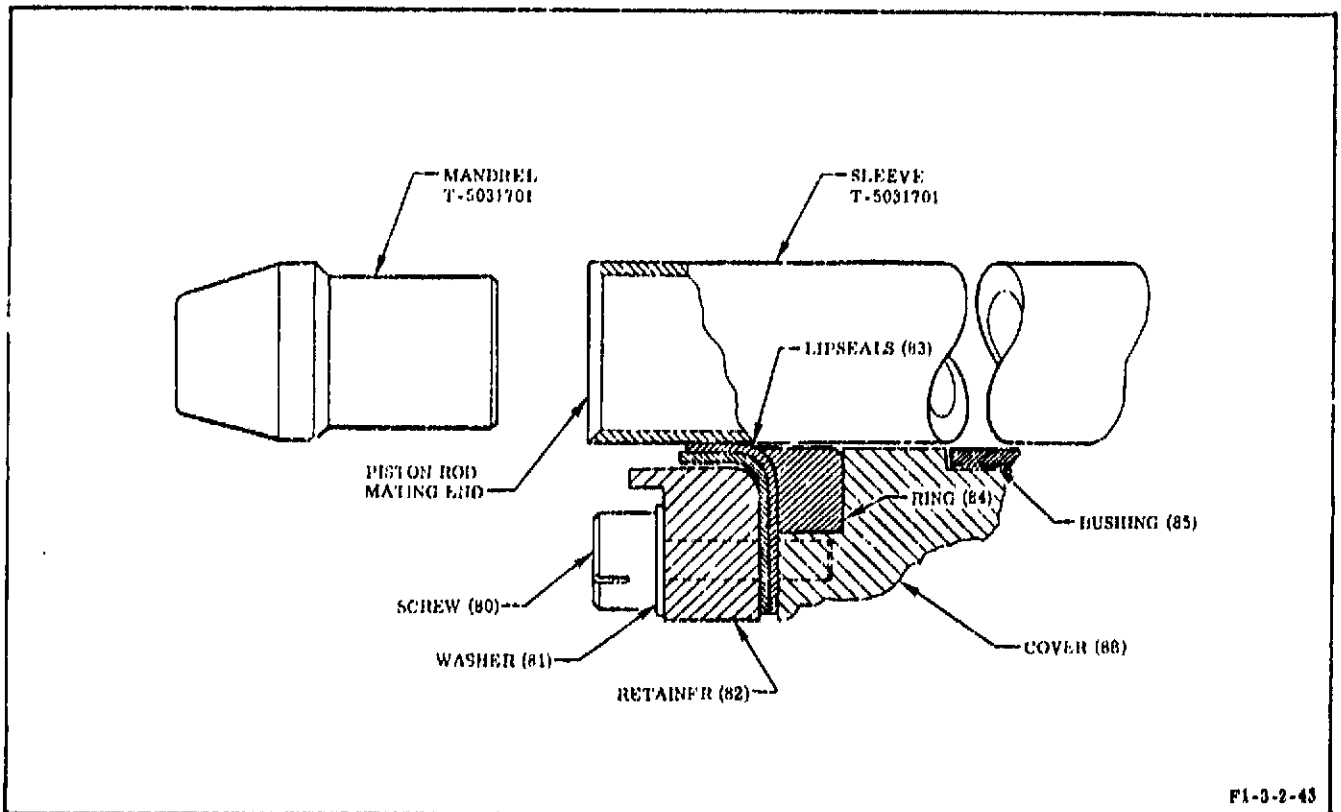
Oxidizer Valve Cover Lip Seal Installation
